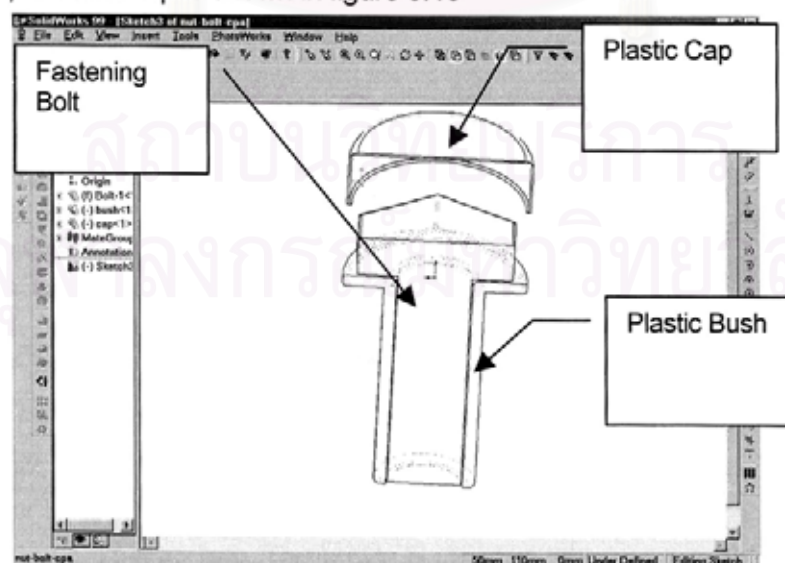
Cut section view of the plastic cap, plastic bush and bolt for panel fastening to the structure.
